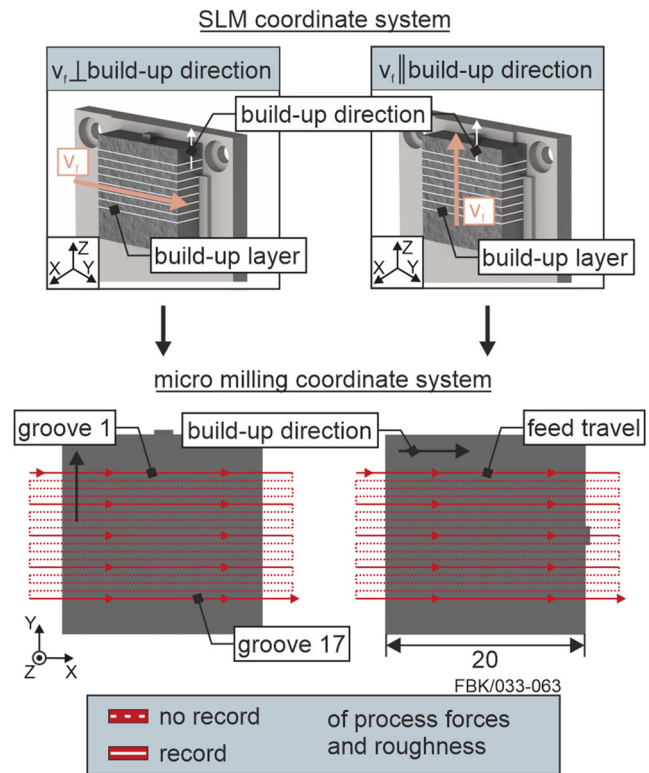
Feed direction in relation to build-up direction during micromilling and arrangement of grooves on workpiece
